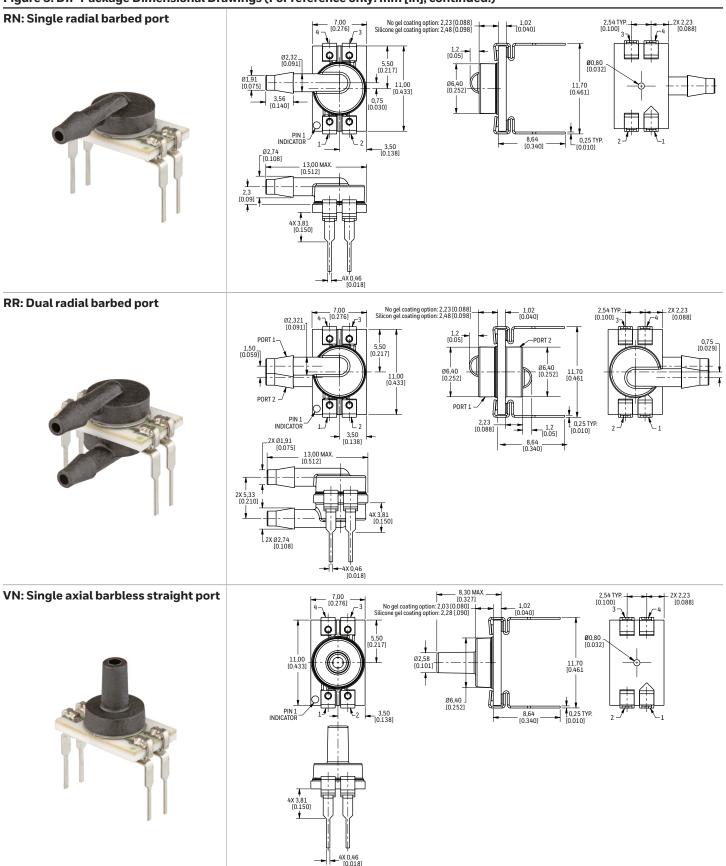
DIP Package Dimensional Drawings (For reference only: mm [in], continued.)
